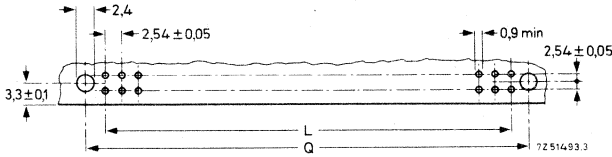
Hole pattern for board mounting of female parts; see Table 4 for dimensions L and Q.
